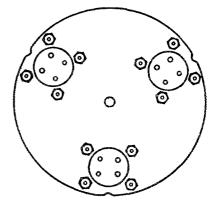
DIAGRAM OF COIL MOUNTS ON THE TURRET-HEAD
